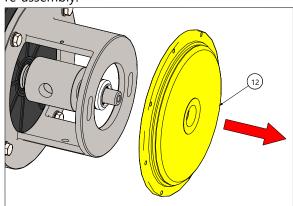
Carefully remove the back casing [12]. The static part of the mechanical seal will remain in the back casing.
